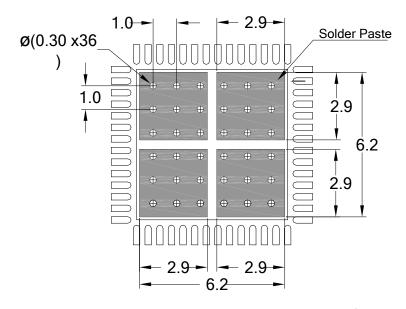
PD69208T4 Top layer Solder Paste and Vias Recommended PCB Layout for Thermal Pad Array (mm)
